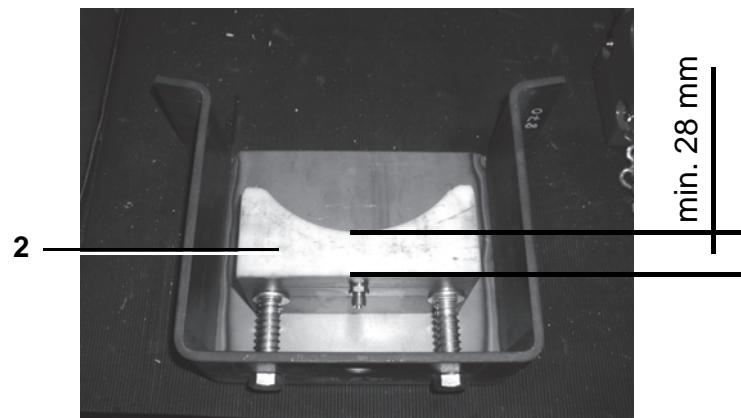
Plastic sliding wear pad of slewing ring lubrication
